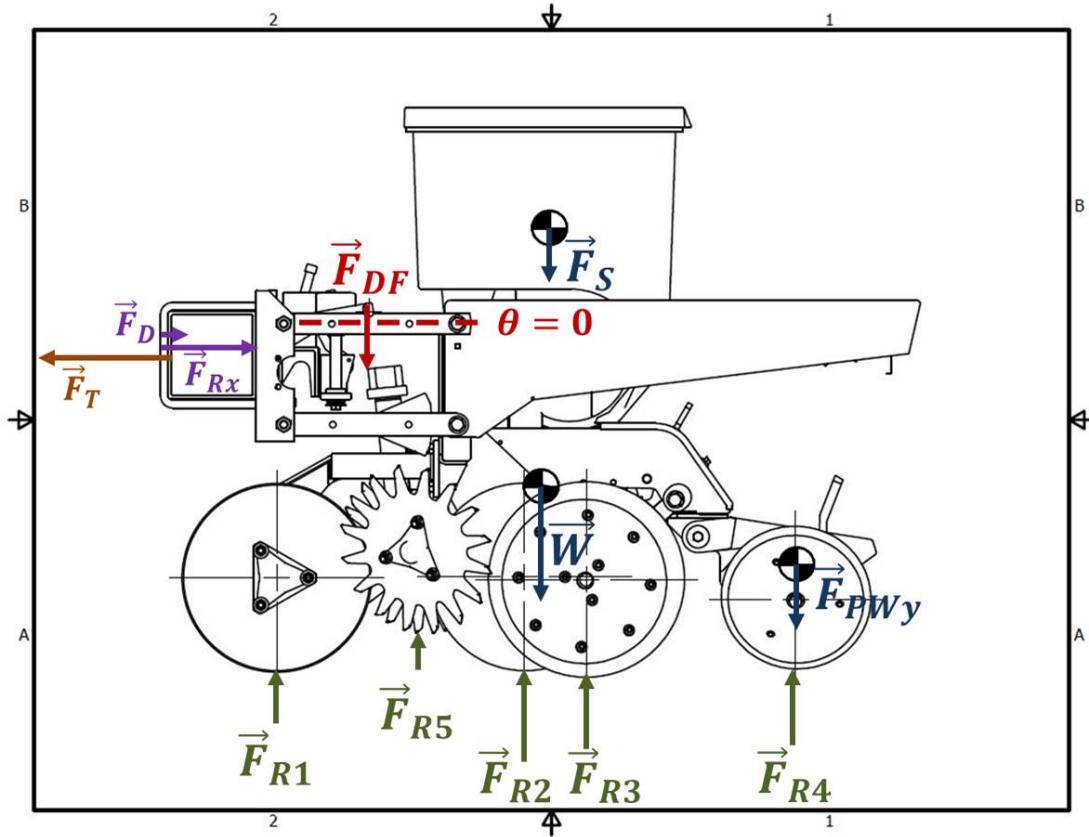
Force diagram providing an inventory of the different forces acting on individual planter row-unit at planting. Example of a John Deere MaxEmerge Plus row-unit.
